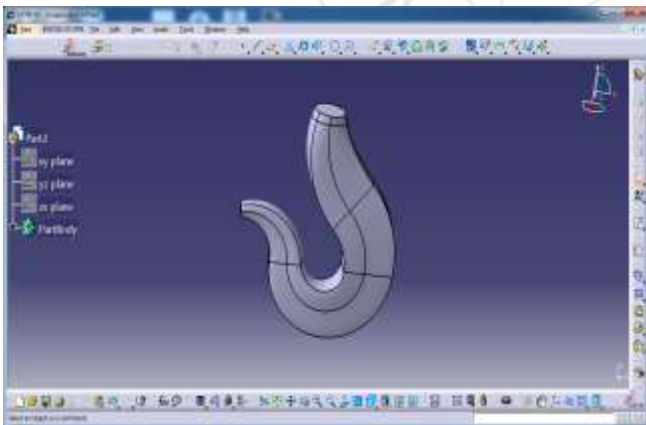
Catia V5 Model of Crane Hook with Trapezoidal Section
